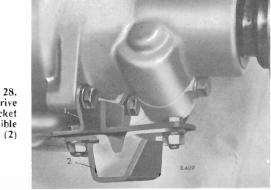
Overdrive support bracket (1) and flexible mounting (2)
